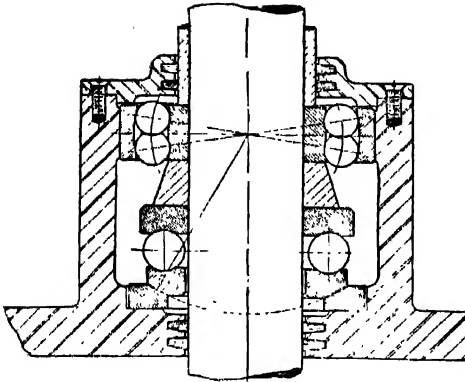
MOUNTING OF A THRUST BEARING. The bearings are mounted on the shaft with two felt washers to keep them clean and watertight.
